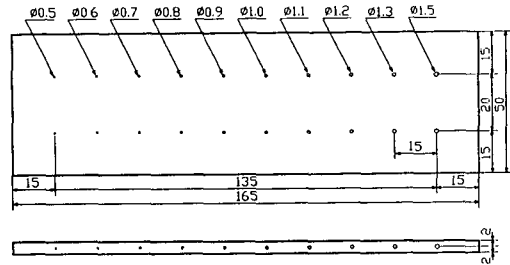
Dimensions of testpiece ③ (unit : mm)
